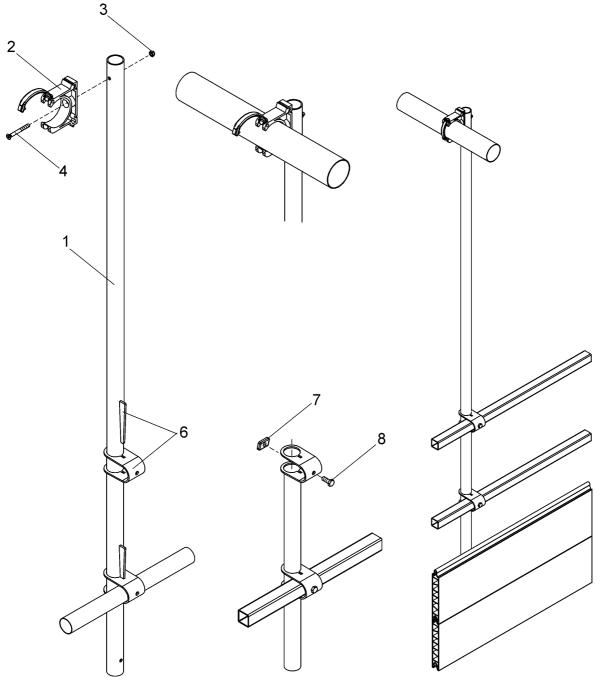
Code no. 20-50-3680 & 20-50-3706
